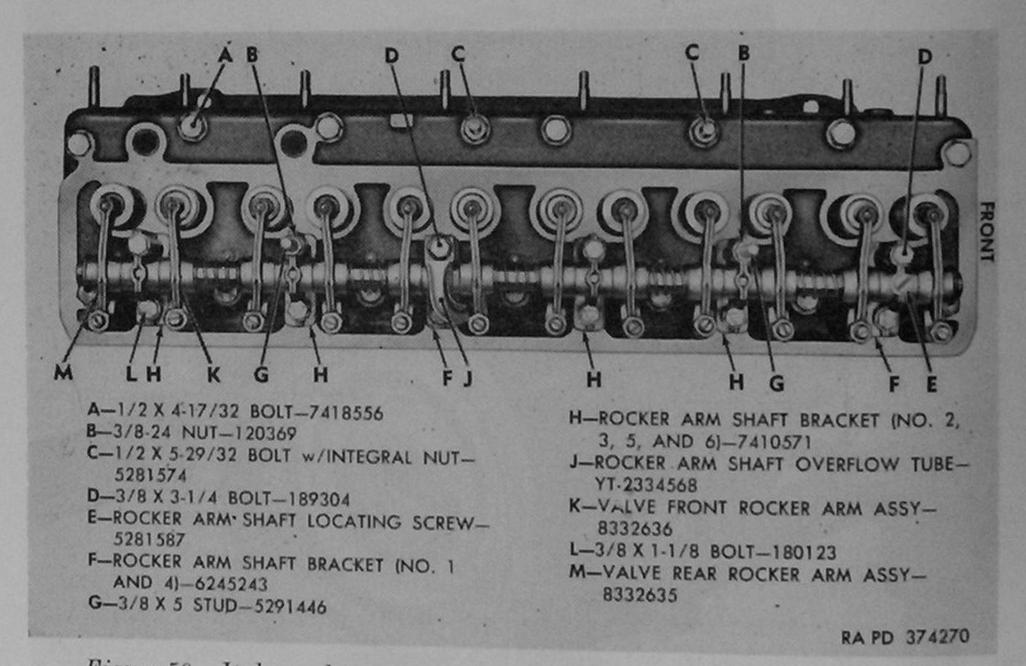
Valve rocker arm and shaft assembly installed on cylinder head.
